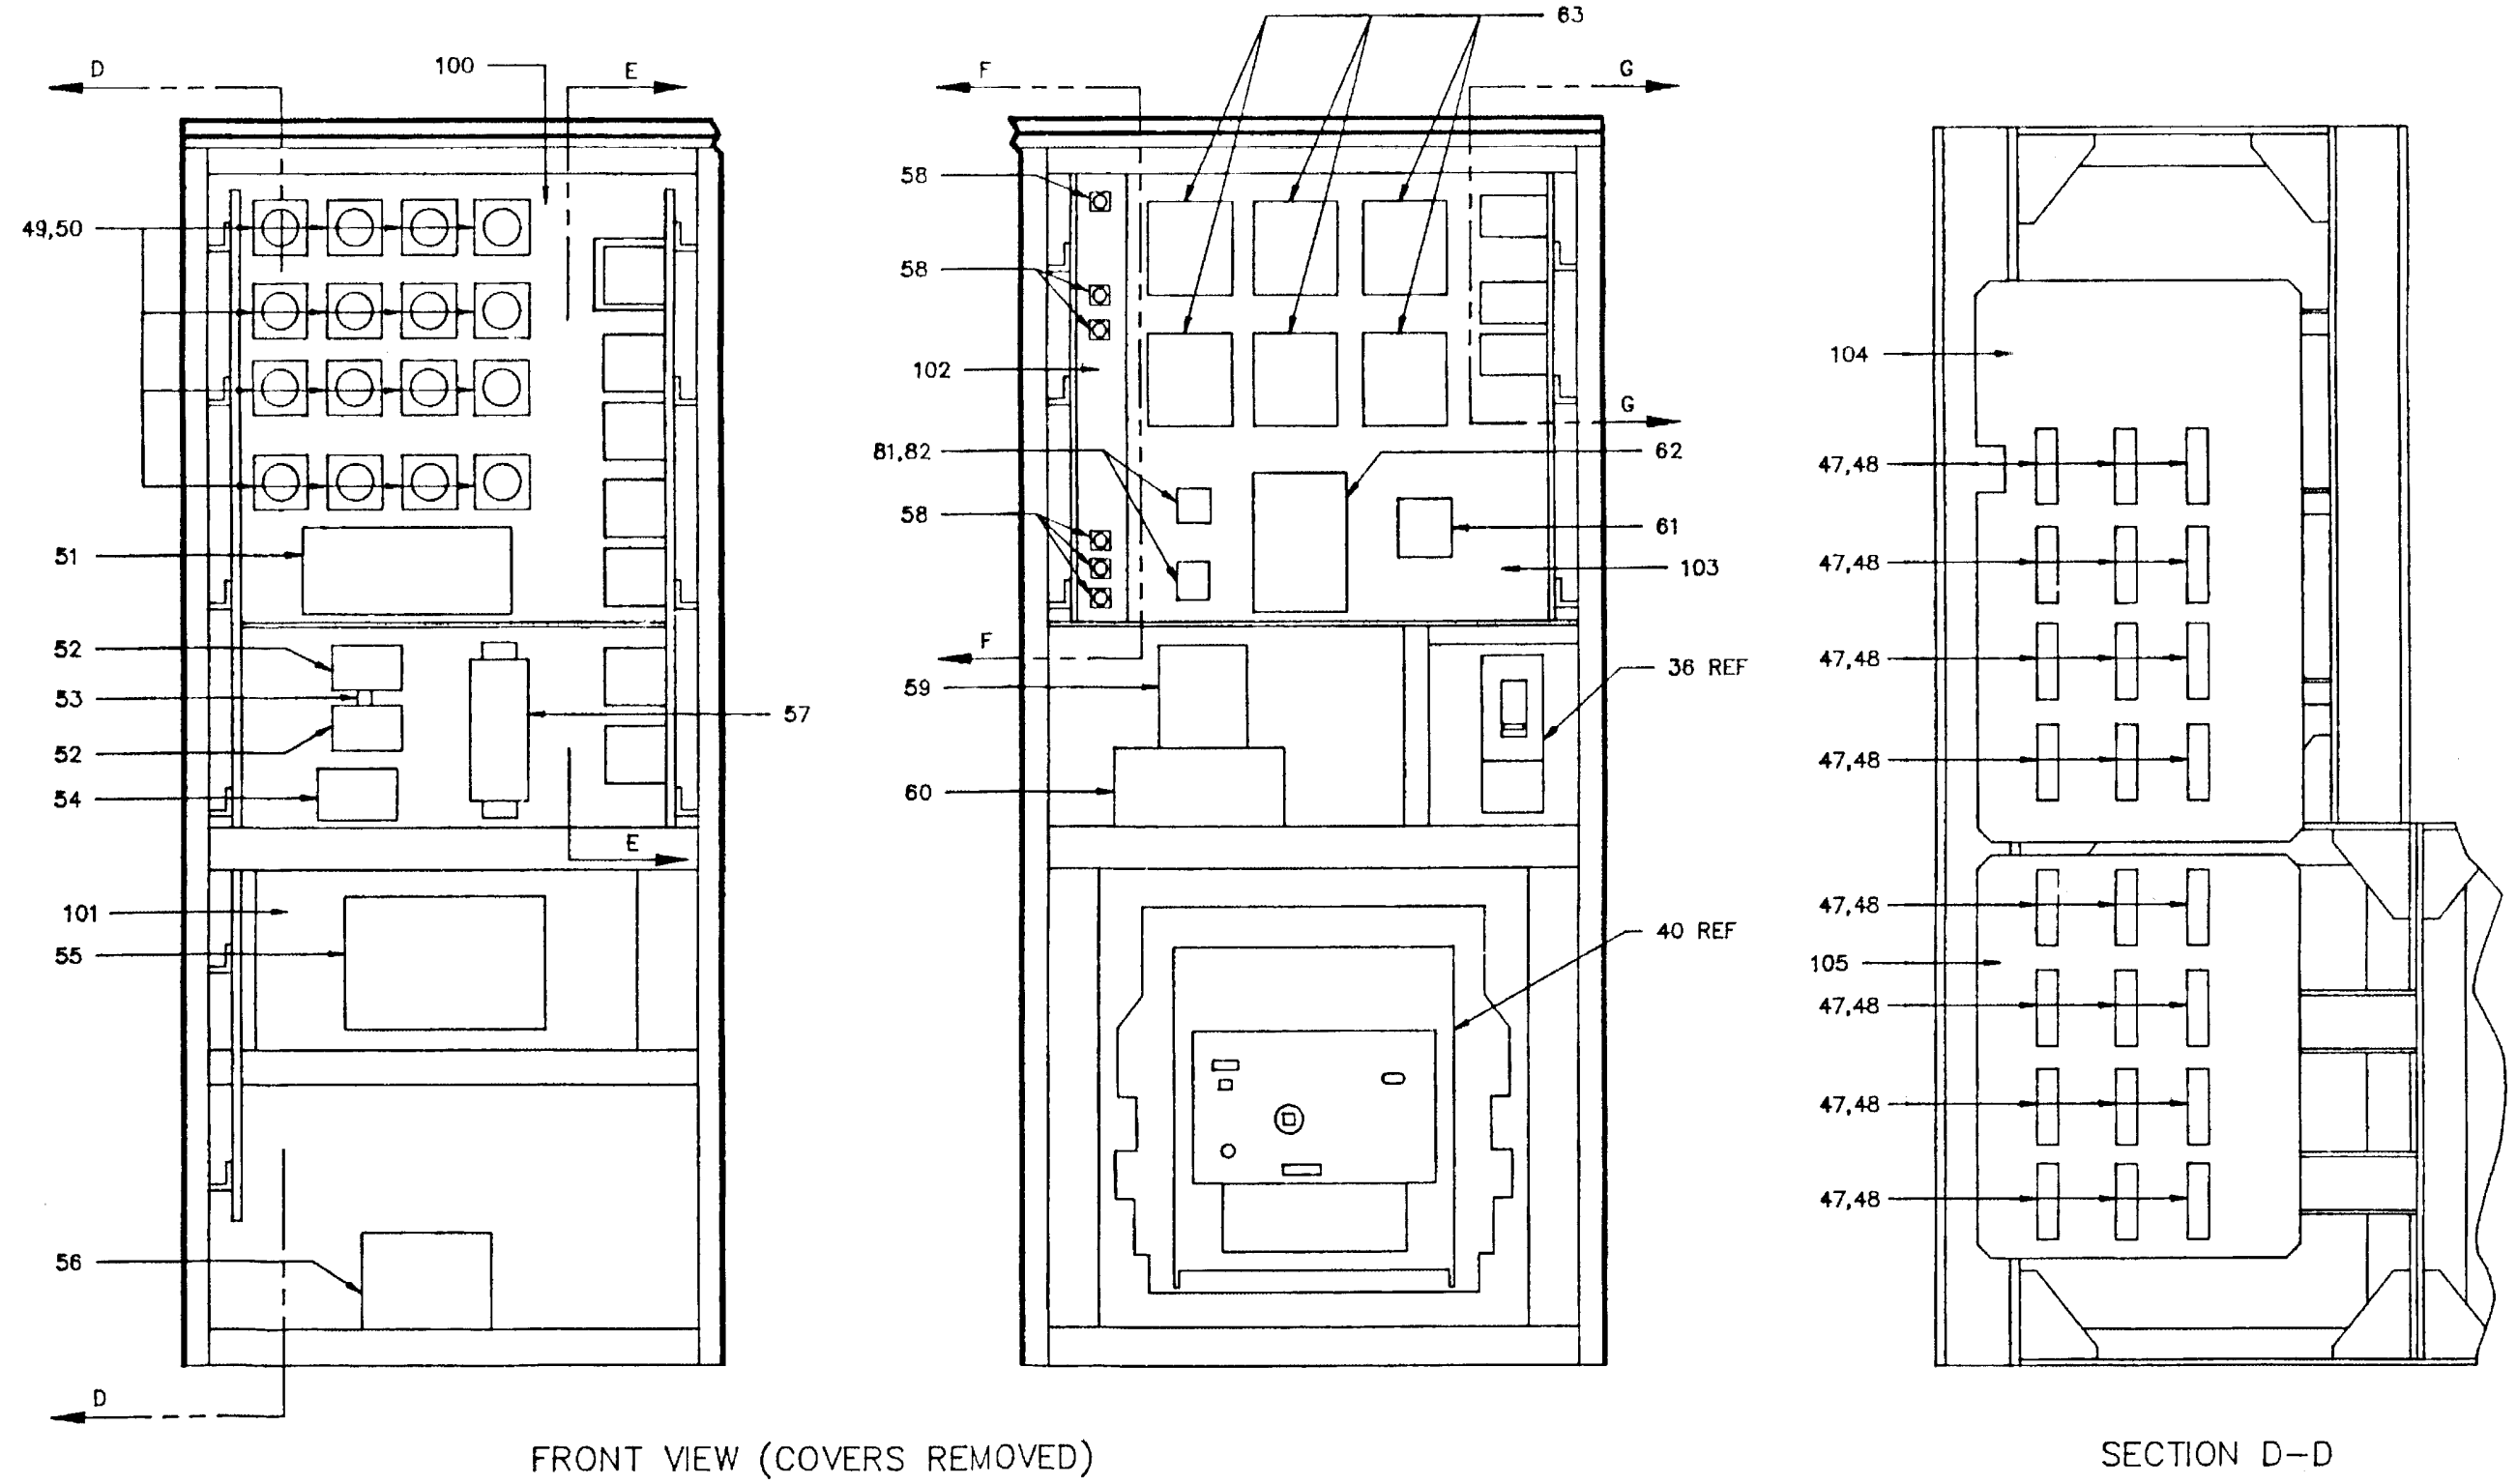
3SG Switchboard Assembly (Sheet 2 of 3)
